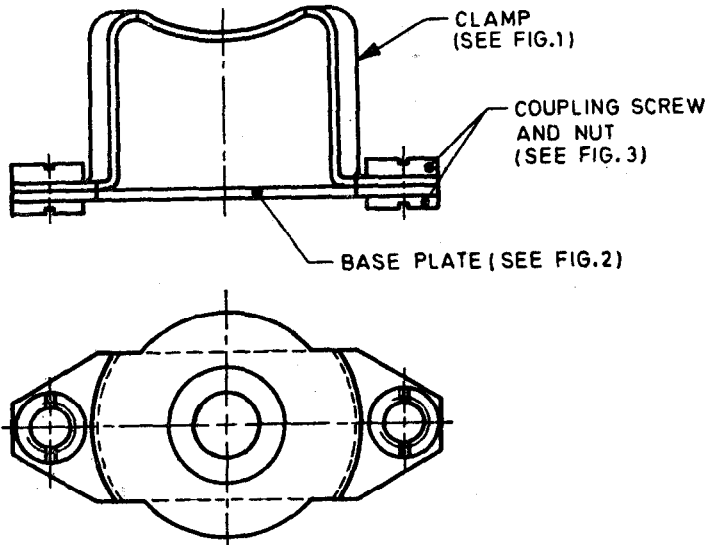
ASSEMBLY DRAWING FOR POT CORE CLAMP
